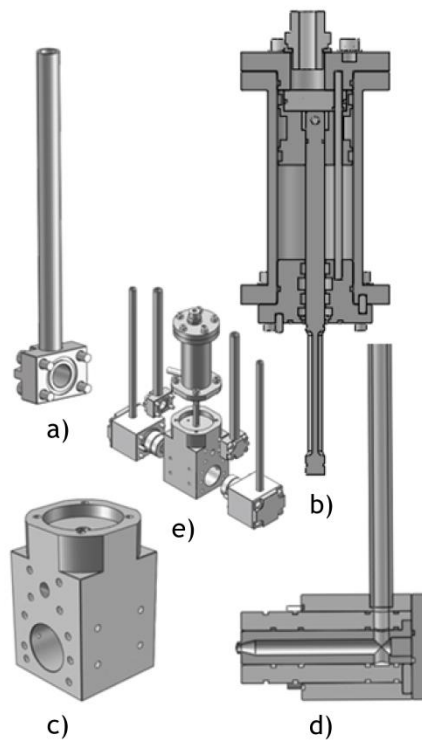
Cad drawing of the Mixing-Head groups: a) Material outlet b) cylinder and cleaning piston c) Mixing-Head Body d) Material Inlet e) exploded view of the Mixing-Head
